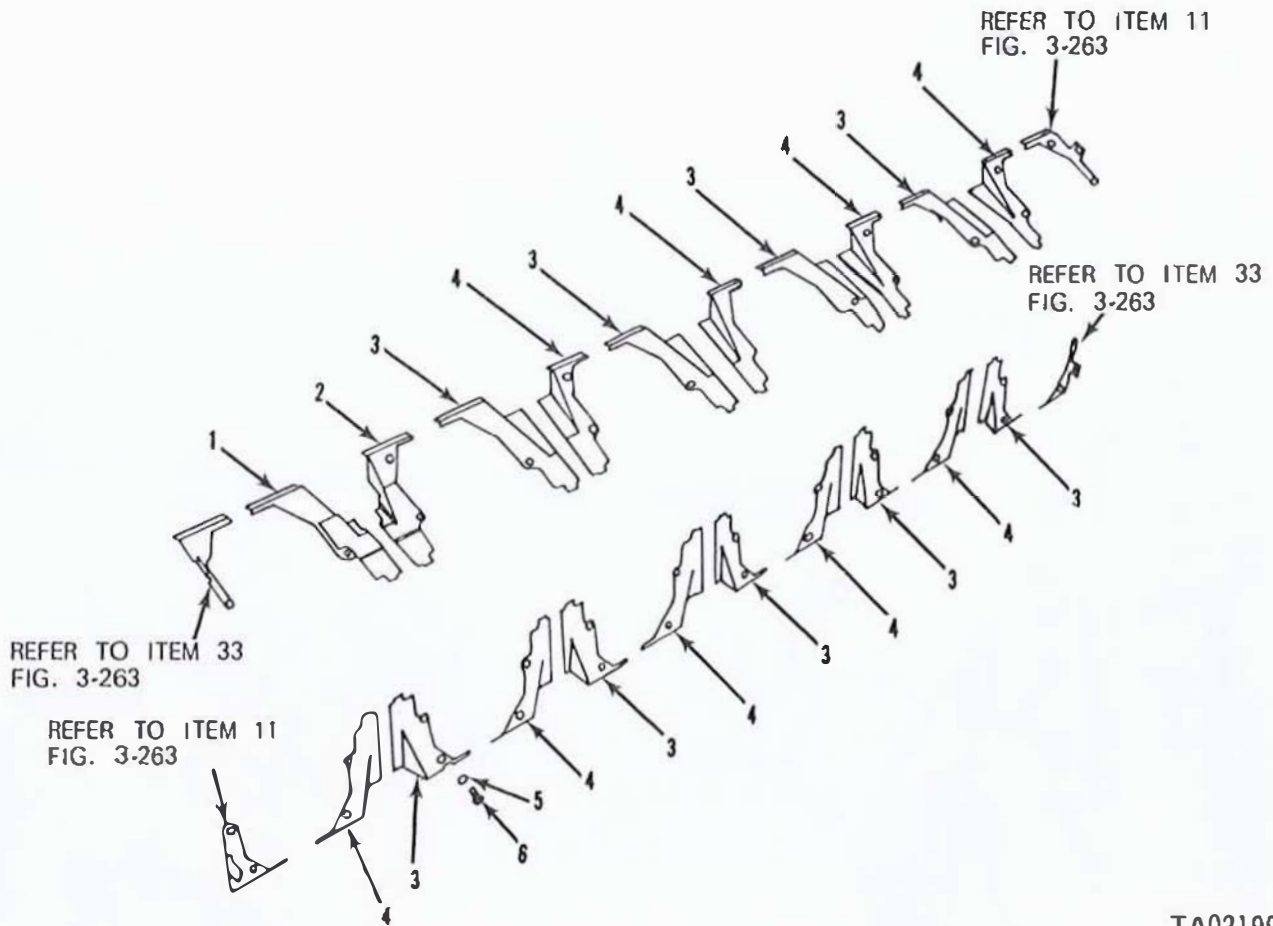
Engine shroud - exploded view, model AVDS-1790-2C and AVDS1790-2D engines.
